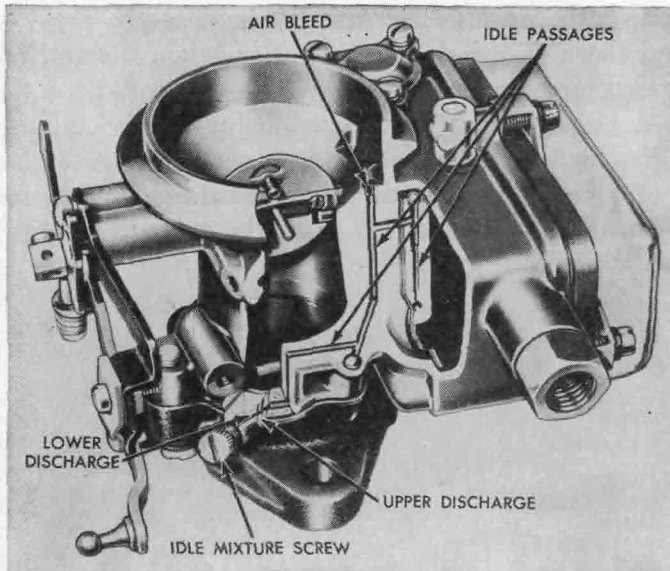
Carburetor cut away to show idle circuit. (Ford Motor Company)
